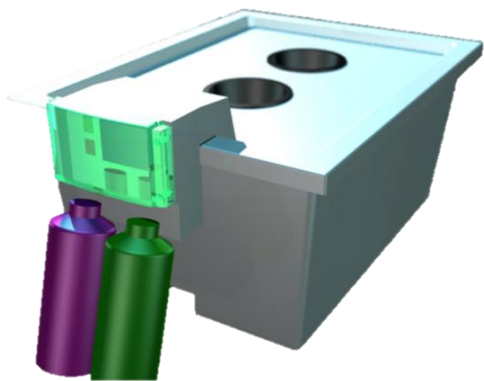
Prototype Reservoir and Electronics Housing Enclosure.
